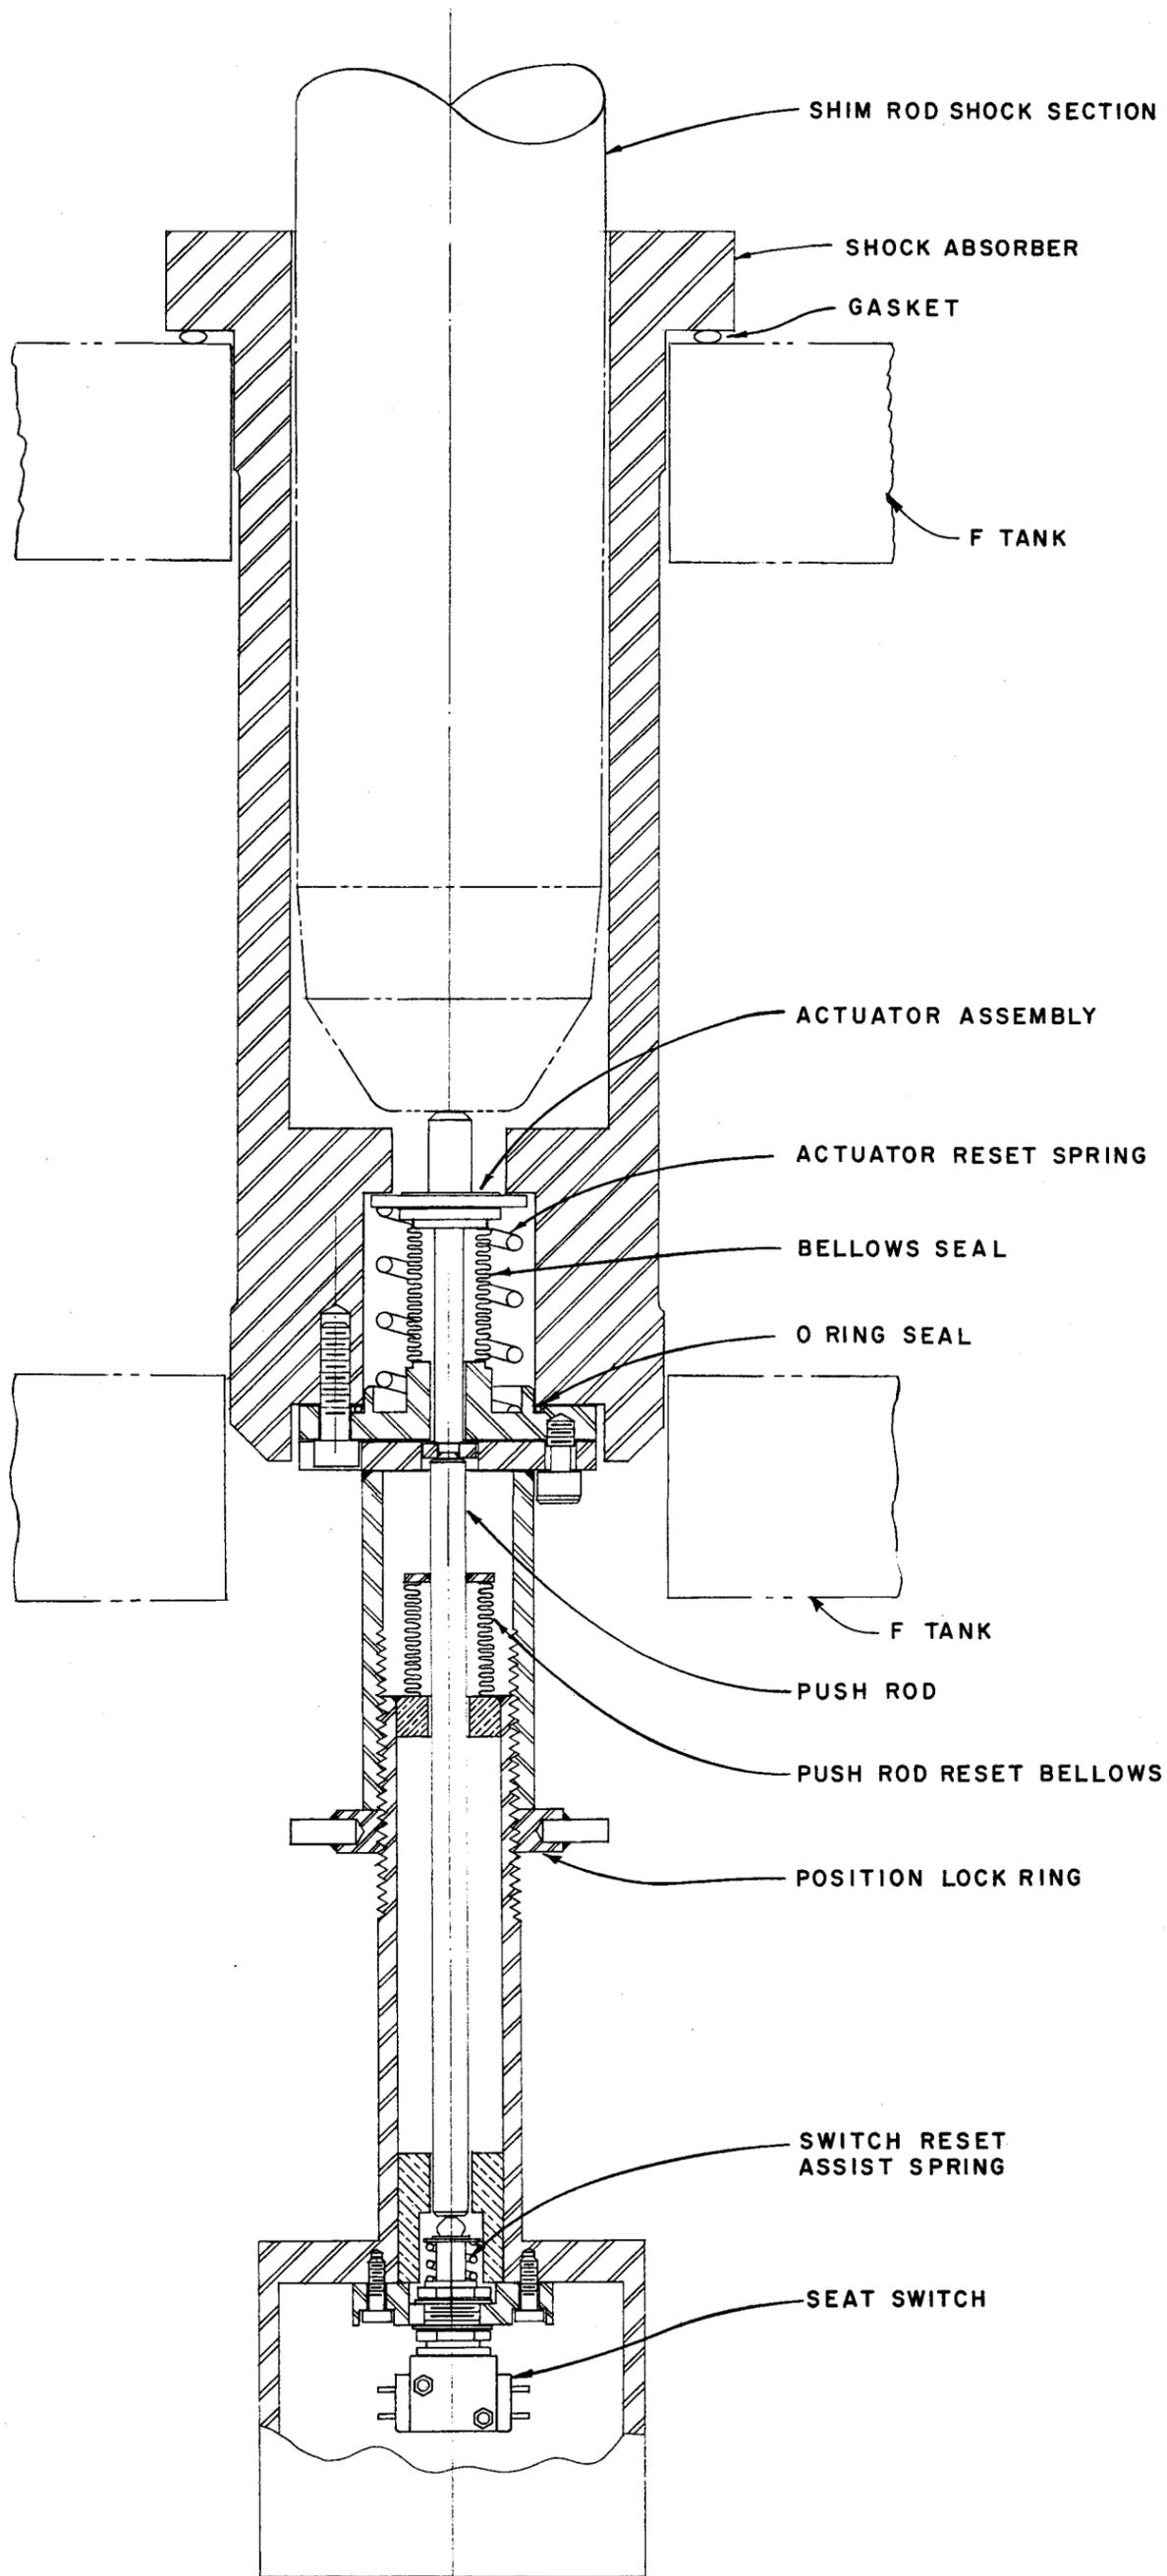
Shock Absorber Assembly for the LITR Shim Rods
